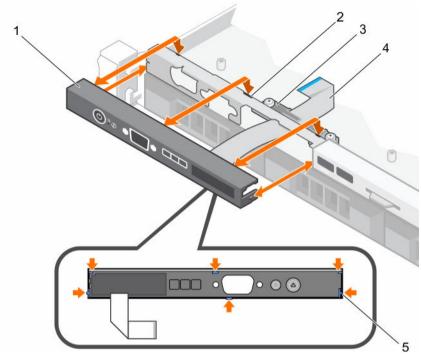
Removing and installing the LCD control panel—four 3.5-inch hot swappable hard drive chassis
